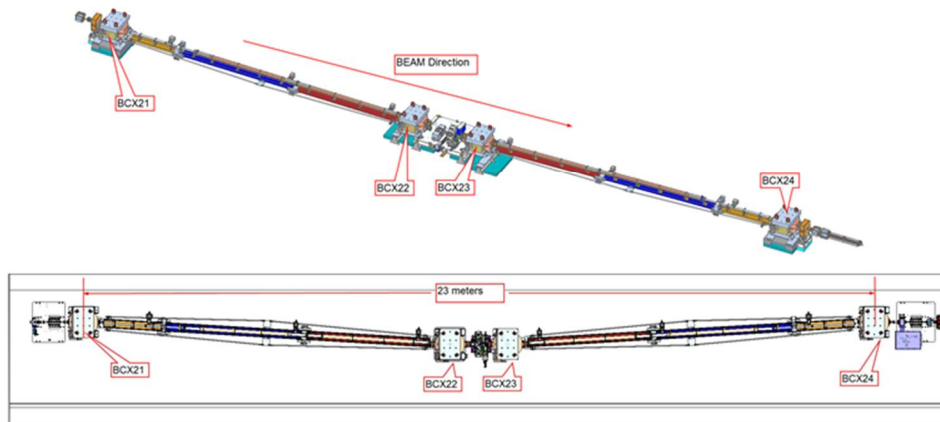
Isometric and Top View of Second Bunch Compressor
